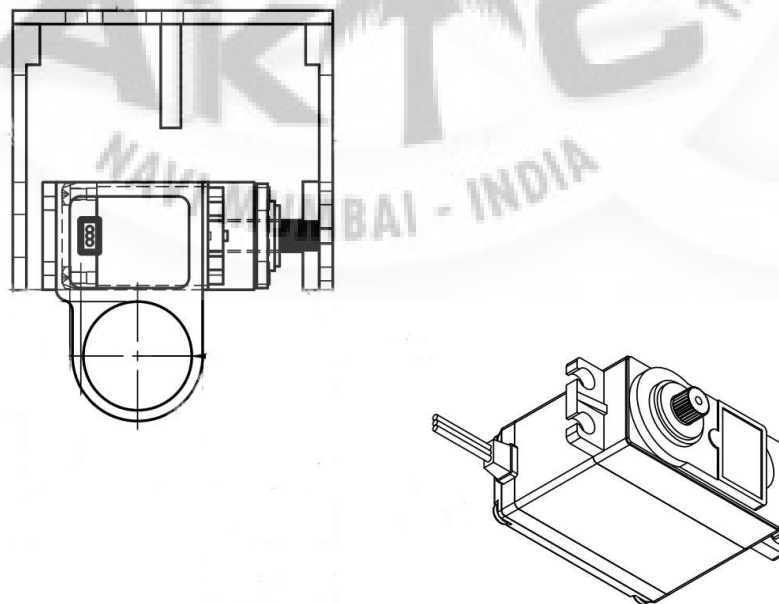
Servo motor MG995 with Tilt rotor assembly.
